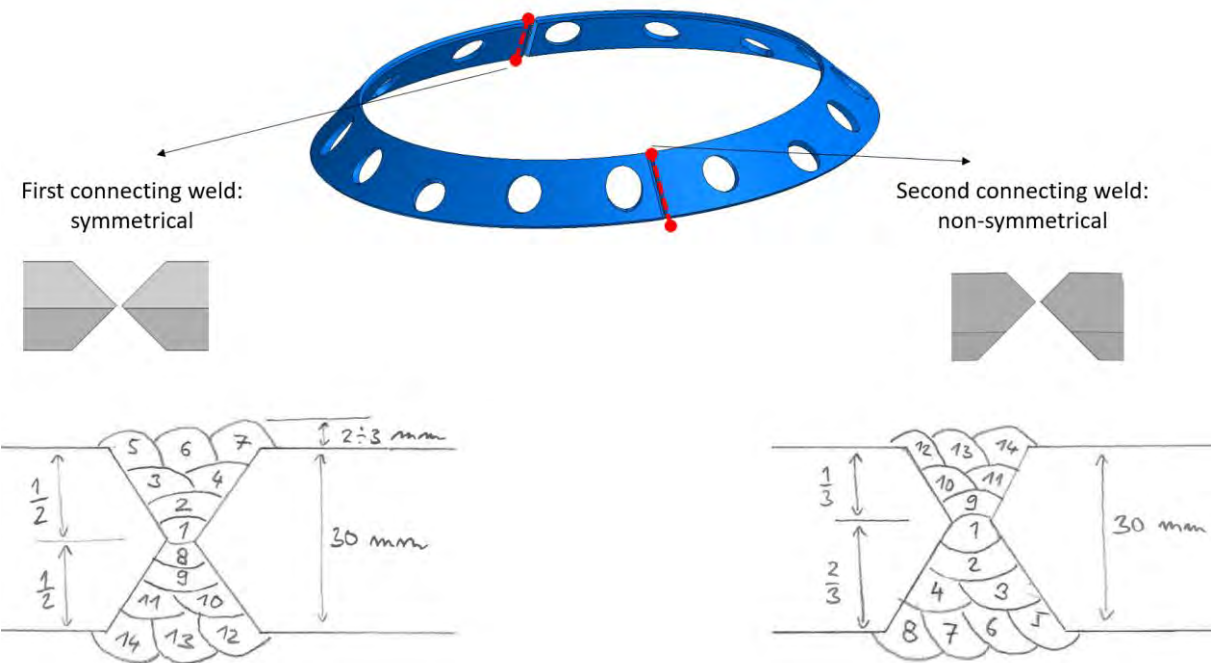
Connecting welds on cone, the corresponding bevel shape and layout of weld passes
